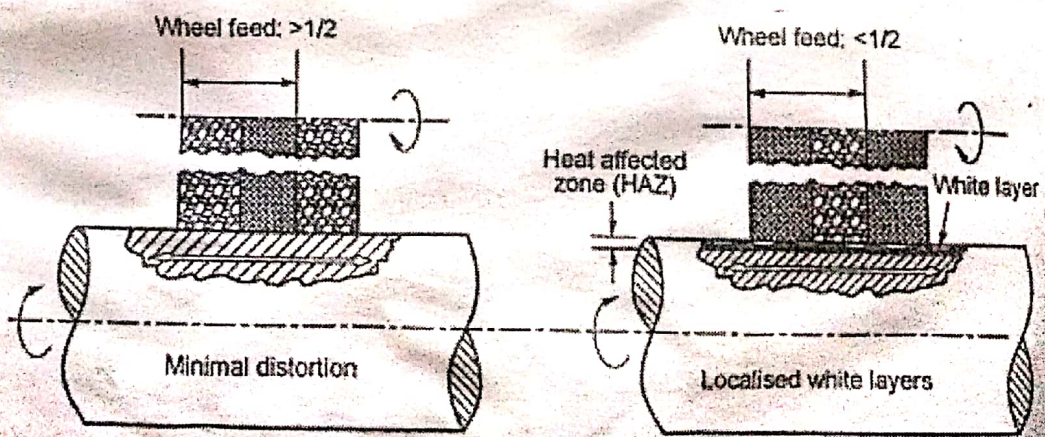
Effect on machined surface integrity during cylindrical grinding
